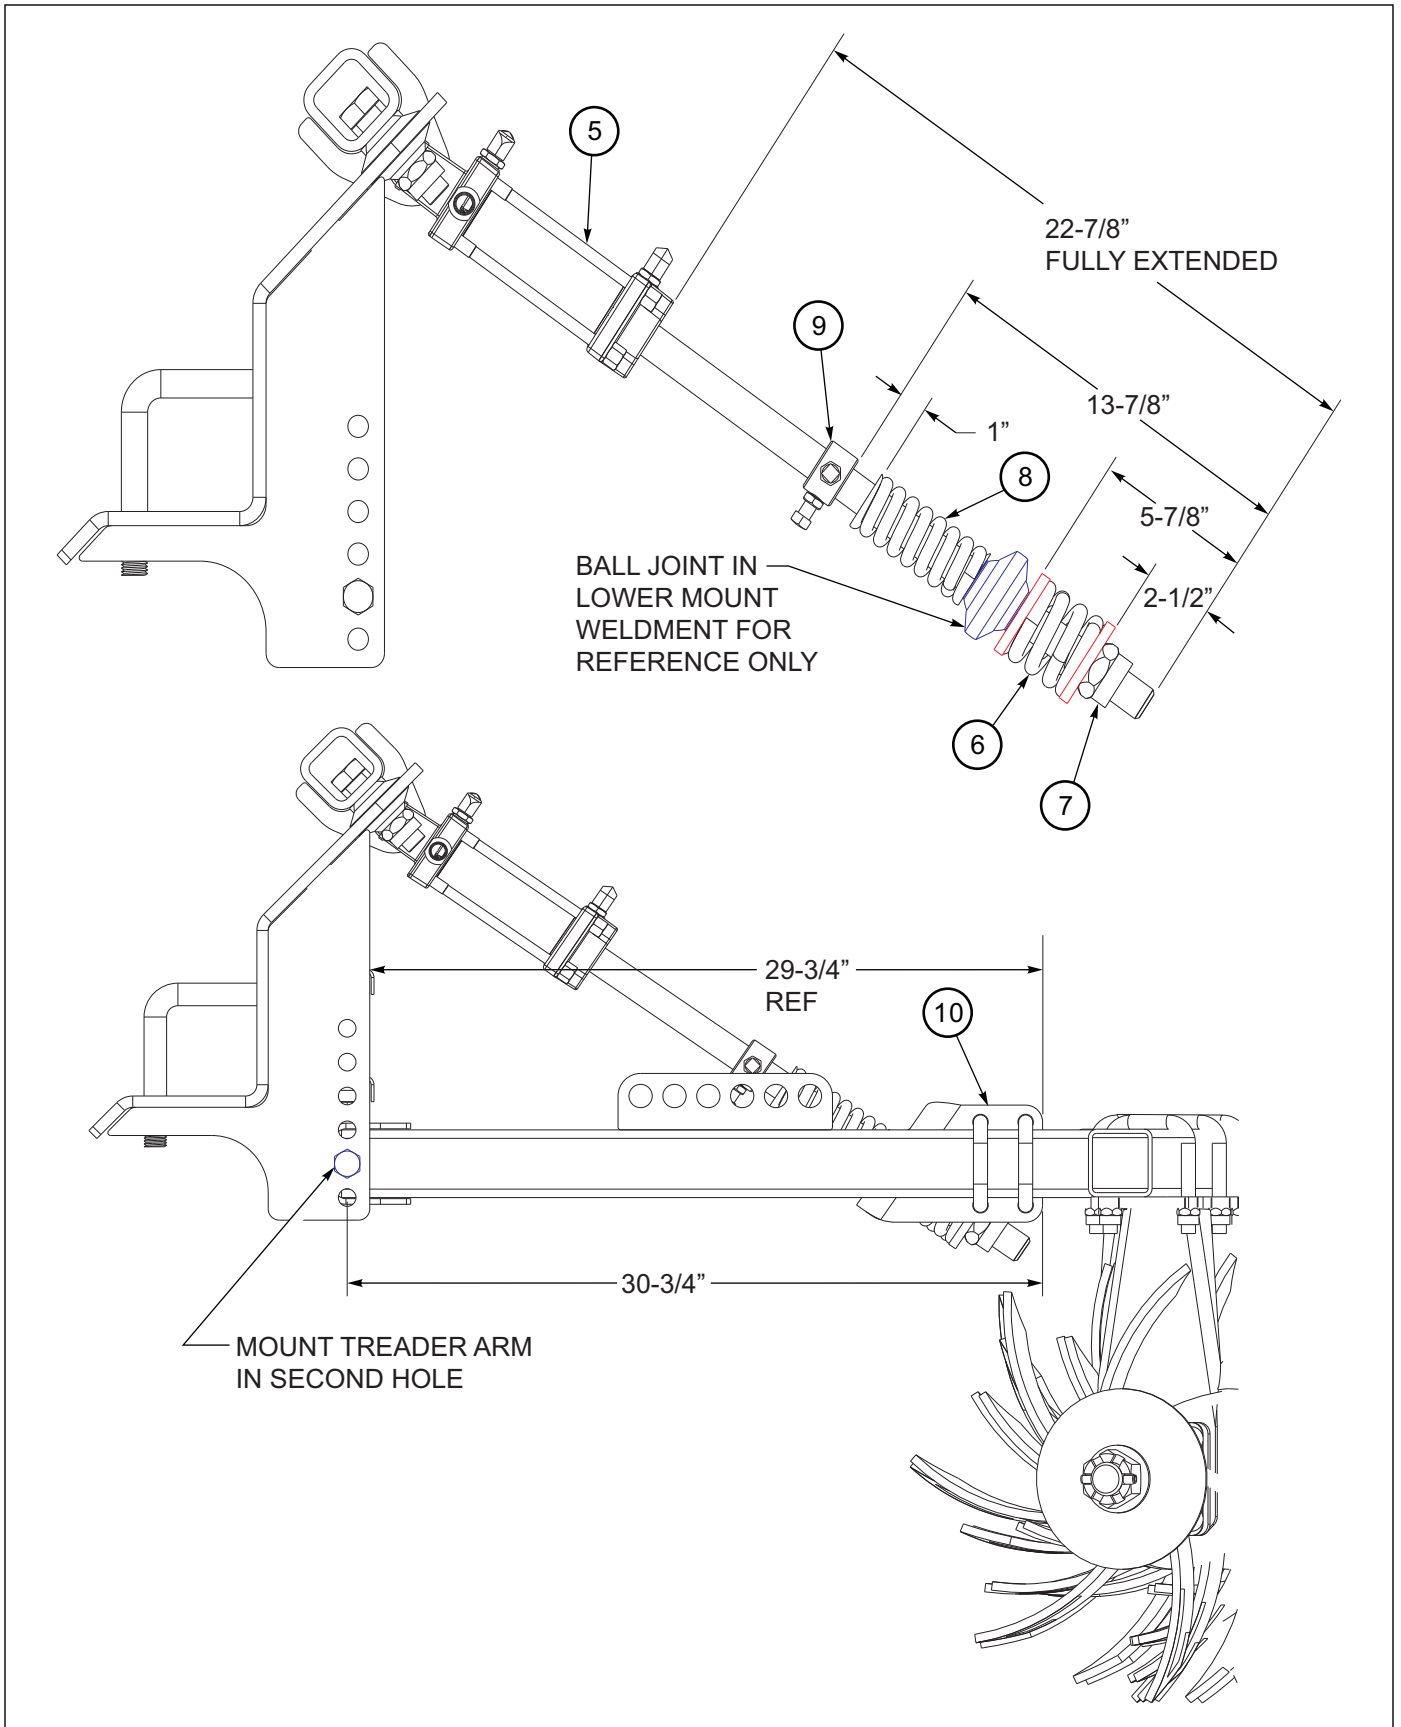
Treader Arm Cylinder Spring Adjustment
